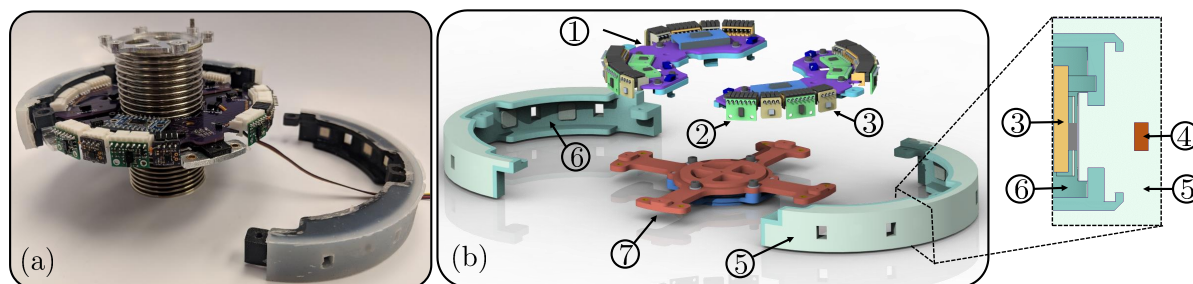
(a) Multi-modal sensing disk unit mounted on a bellow subassembly with the outer cover removed. (b) Exploded view of the SDU components: ① two custom PCBs for multiplexed I<sup>2</sup>C communication, ② 8 time-of-flight sensors, ③ 8 Hall effect sensors, ④ magnets used for Hall effect-based contact sensing, ⑤ silicone outer sleeve, and ⑥ a plastic cover over which the silicone is molded. These components are mounted onto ⑦, an intermediate aluminum disk.
